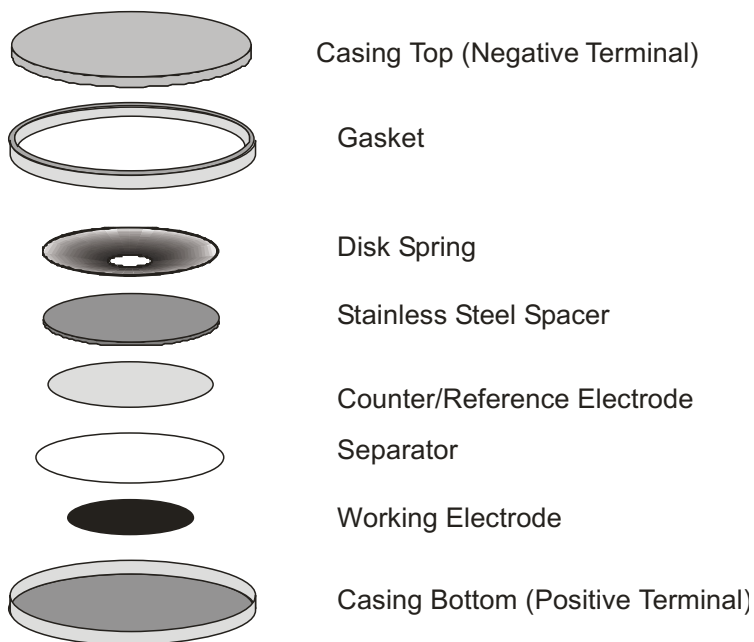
Exploded view of a 2325 sized coin cell's components.^{97,98}
